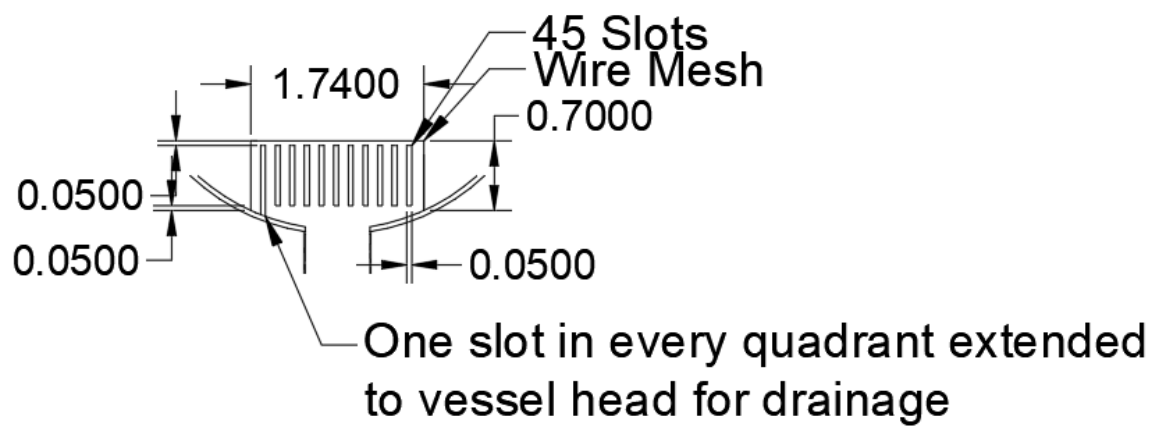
Detailed mechanical drawing of collector in LTS (All dimensions are in m)
